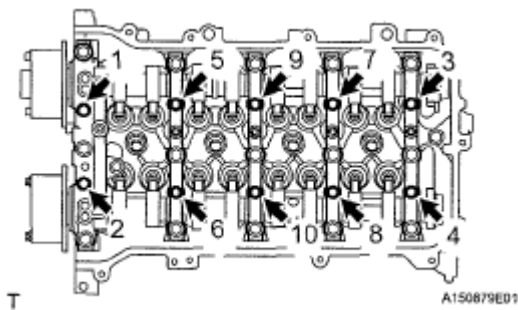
Locating Camshaft Bearing Cap Bolts Loosen Sequence
